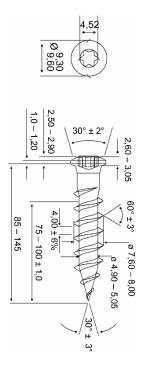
Milletech Itech 8,0 T25 for fixing in light weight concrete
